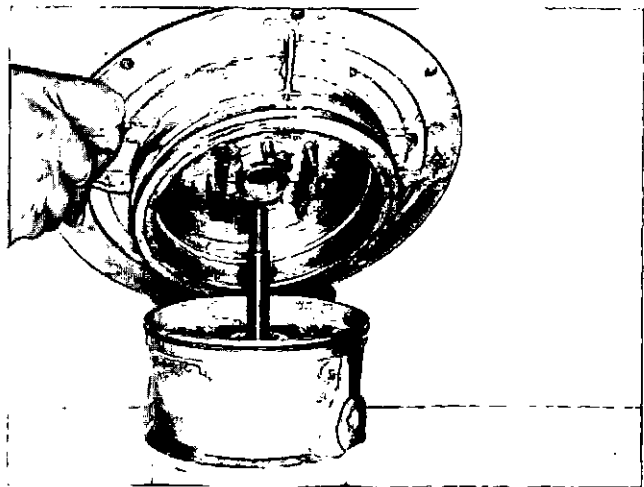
, (VTST44). Installing the diffuser plate onto the bearing housing
